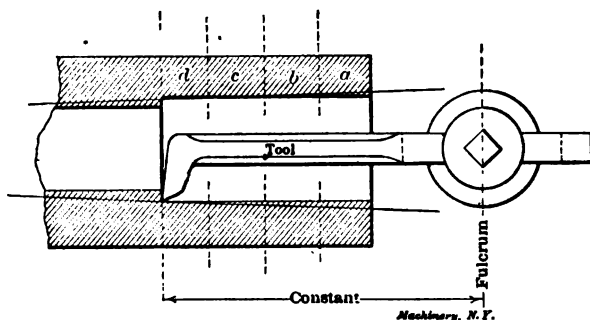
Common Type of Forged Boring Tool, and Results Obtained.
